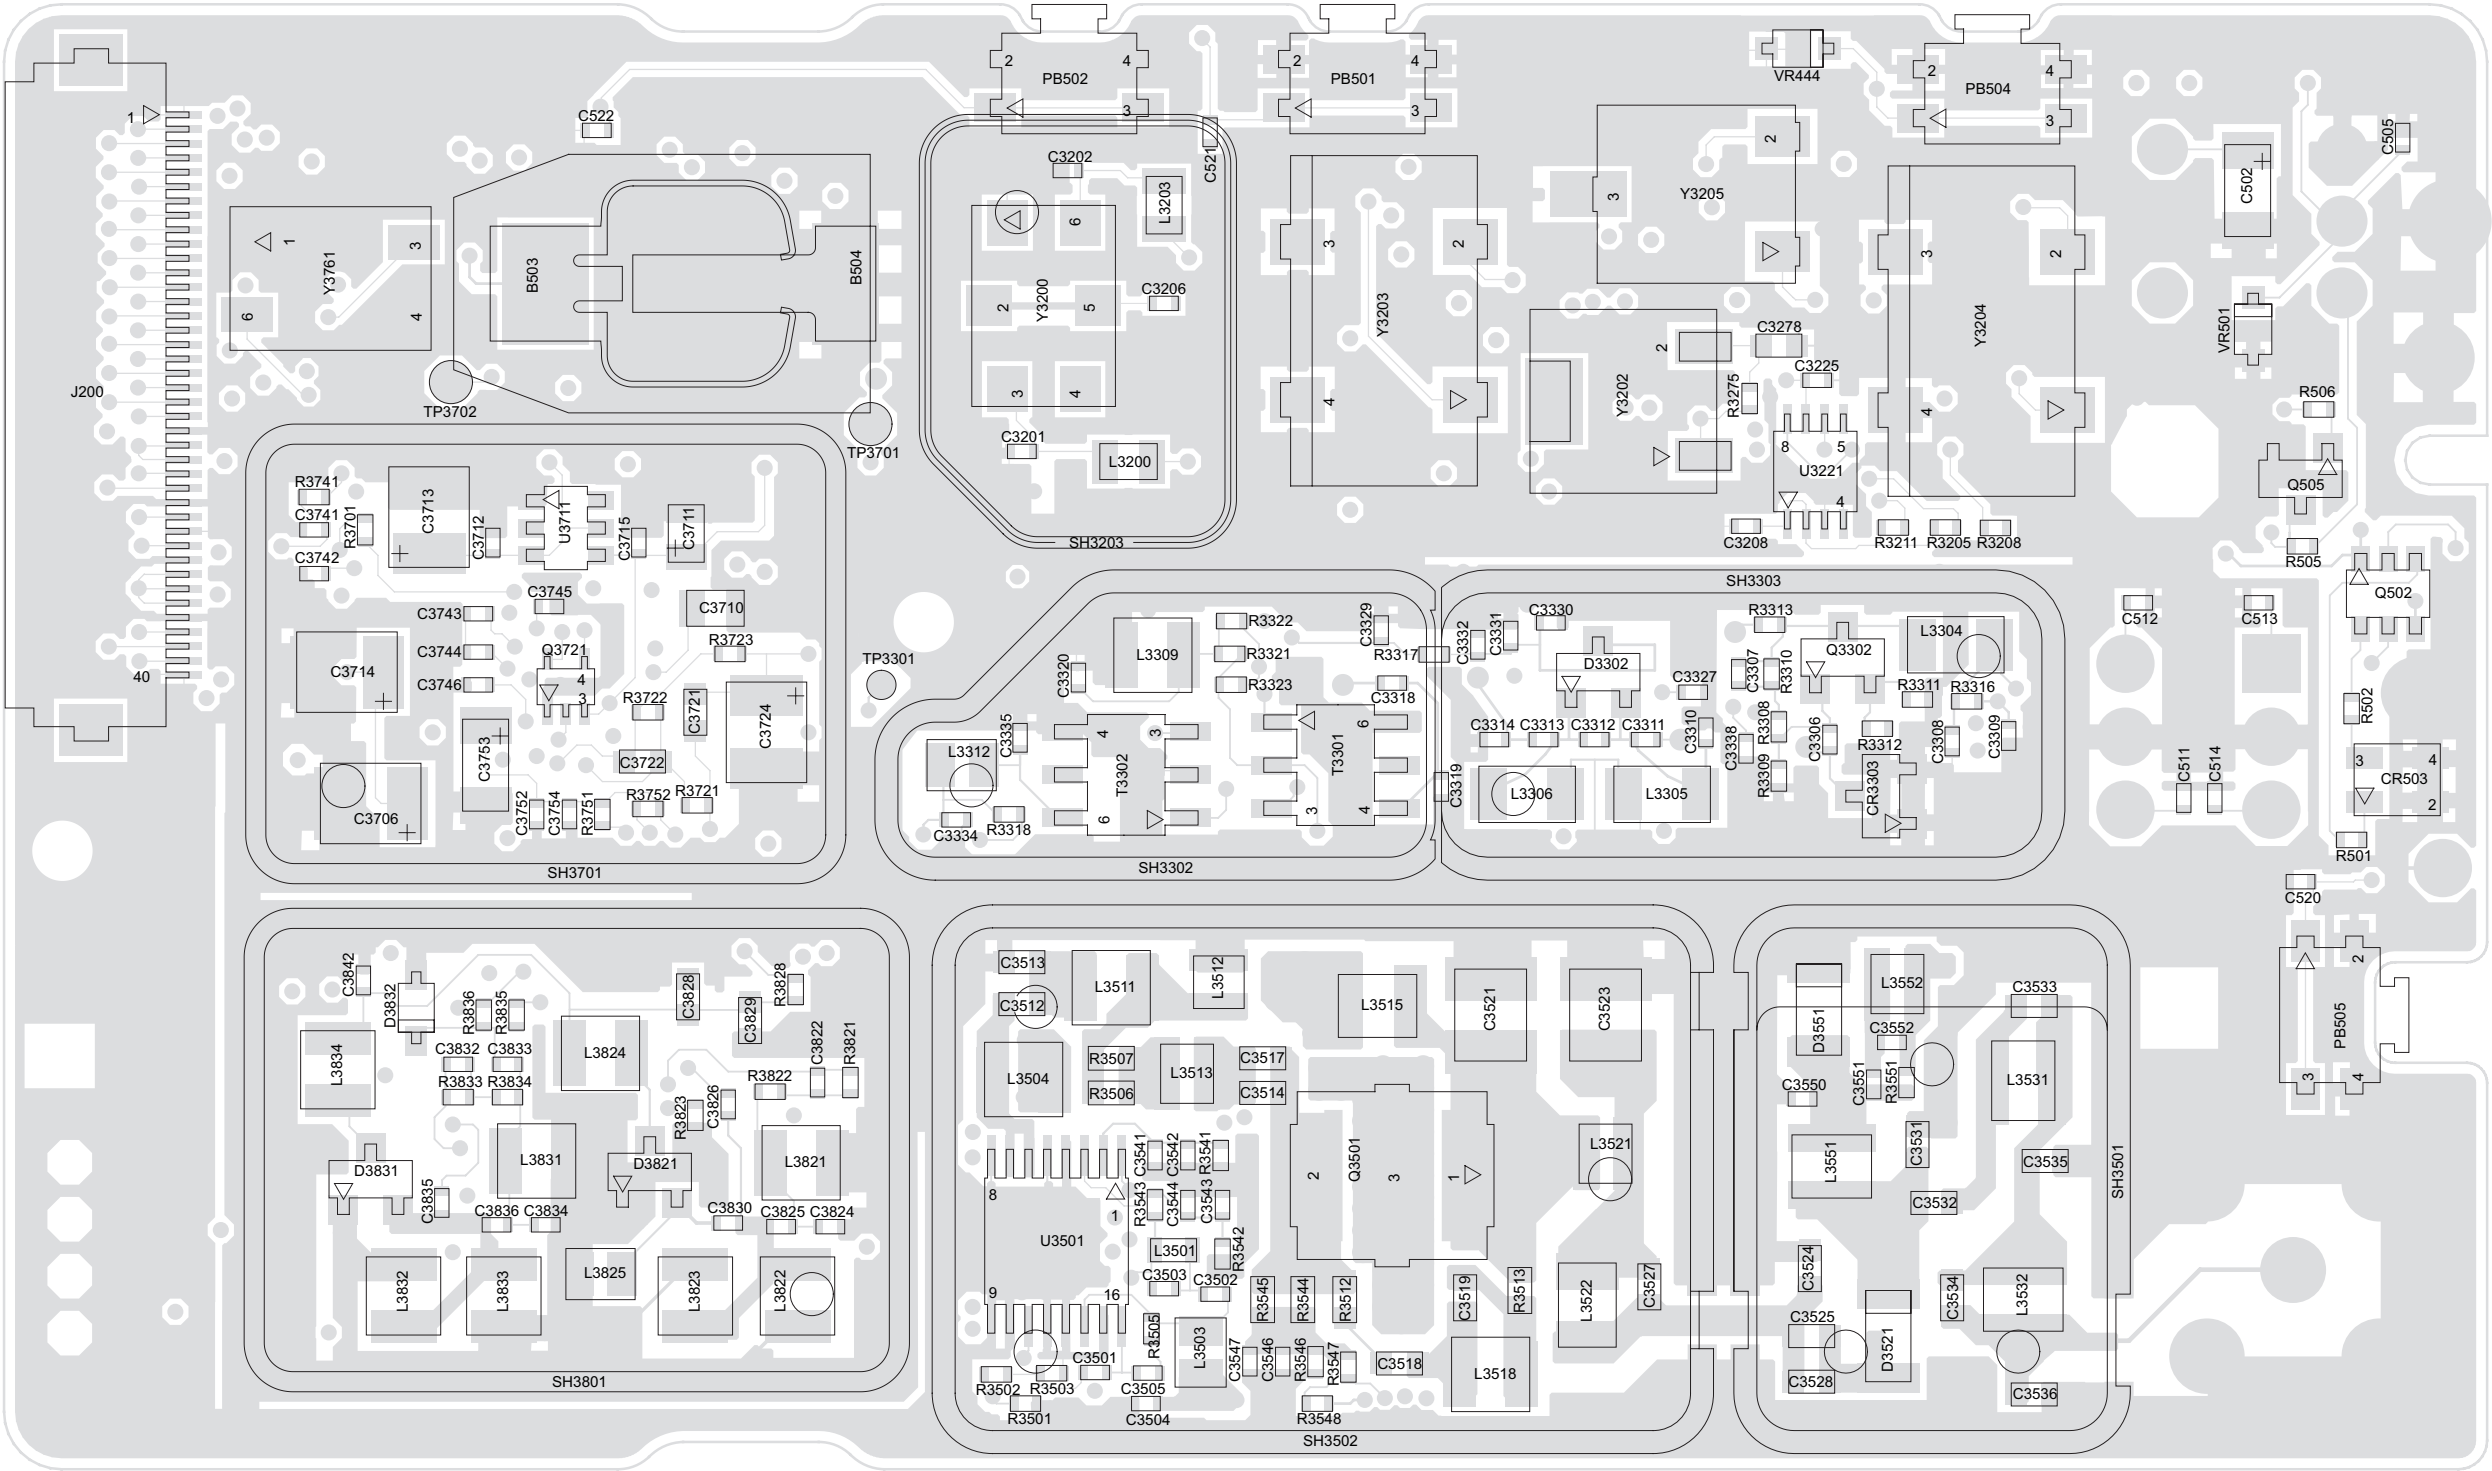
VHF (136-174MHz) Main Board Top Side PCB No. 8471021L01
